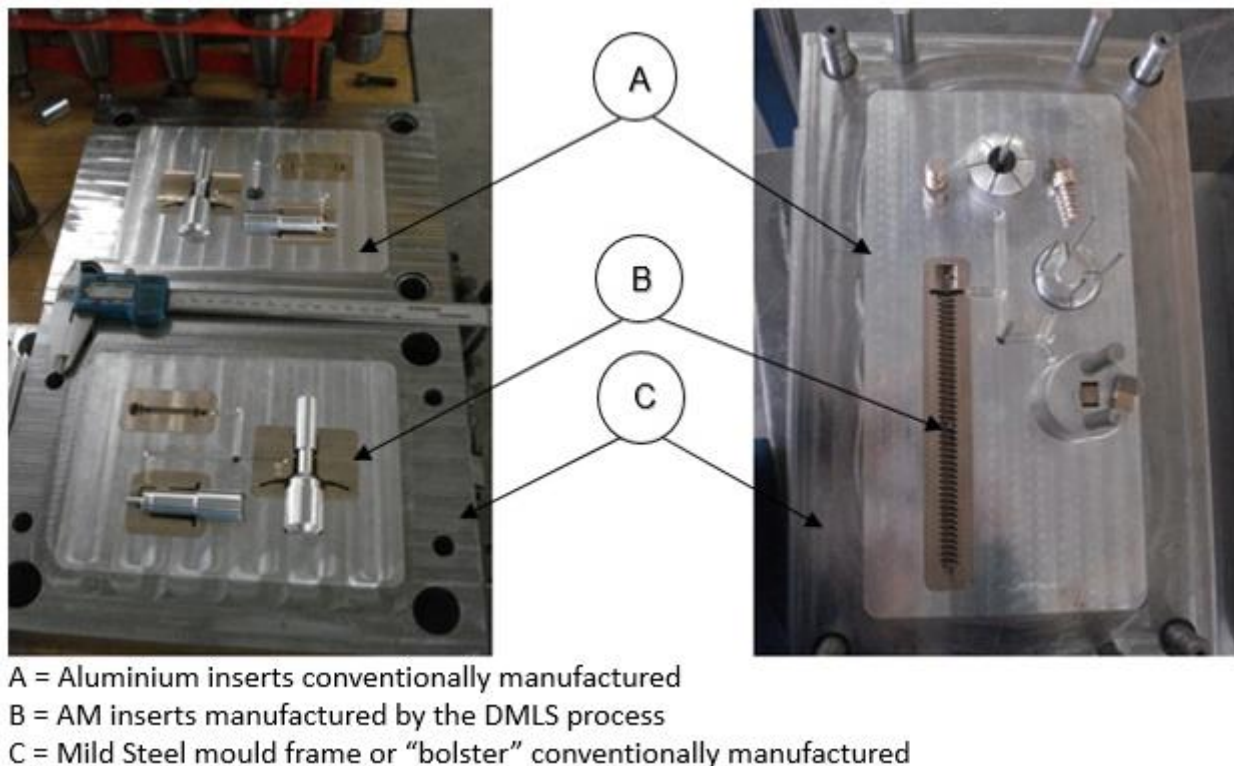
Rapid tooling moulds used to manufacture different injection-moulded products.
